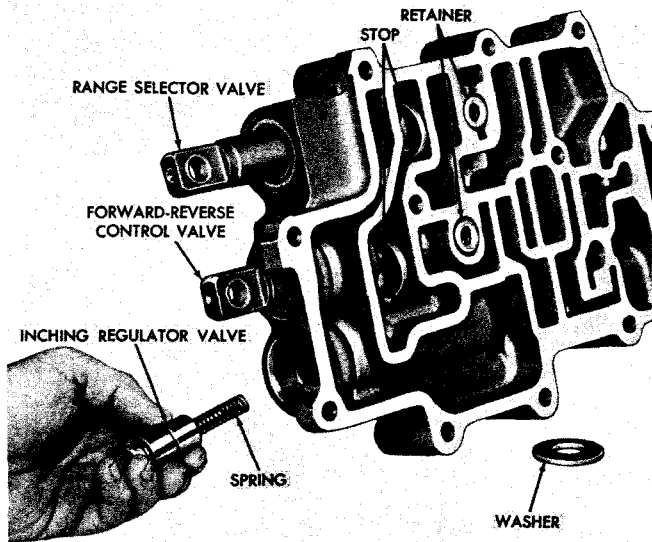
Removing (or installing) inching regulator valve and spring—later model
